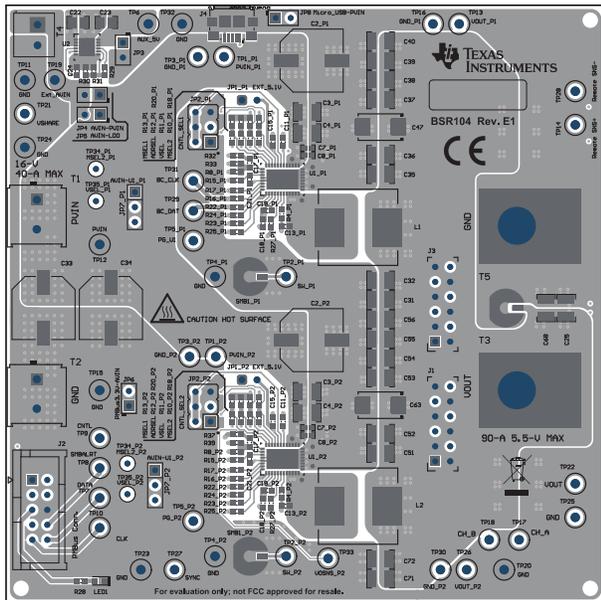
TPS546B24AEVM-2PH Top Side Component View (Top View)
